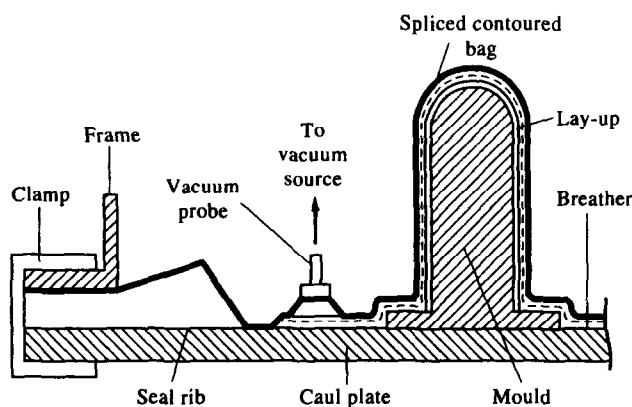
Novel bag sealing and clamping techniques used by Boey<sup>24</sup>
